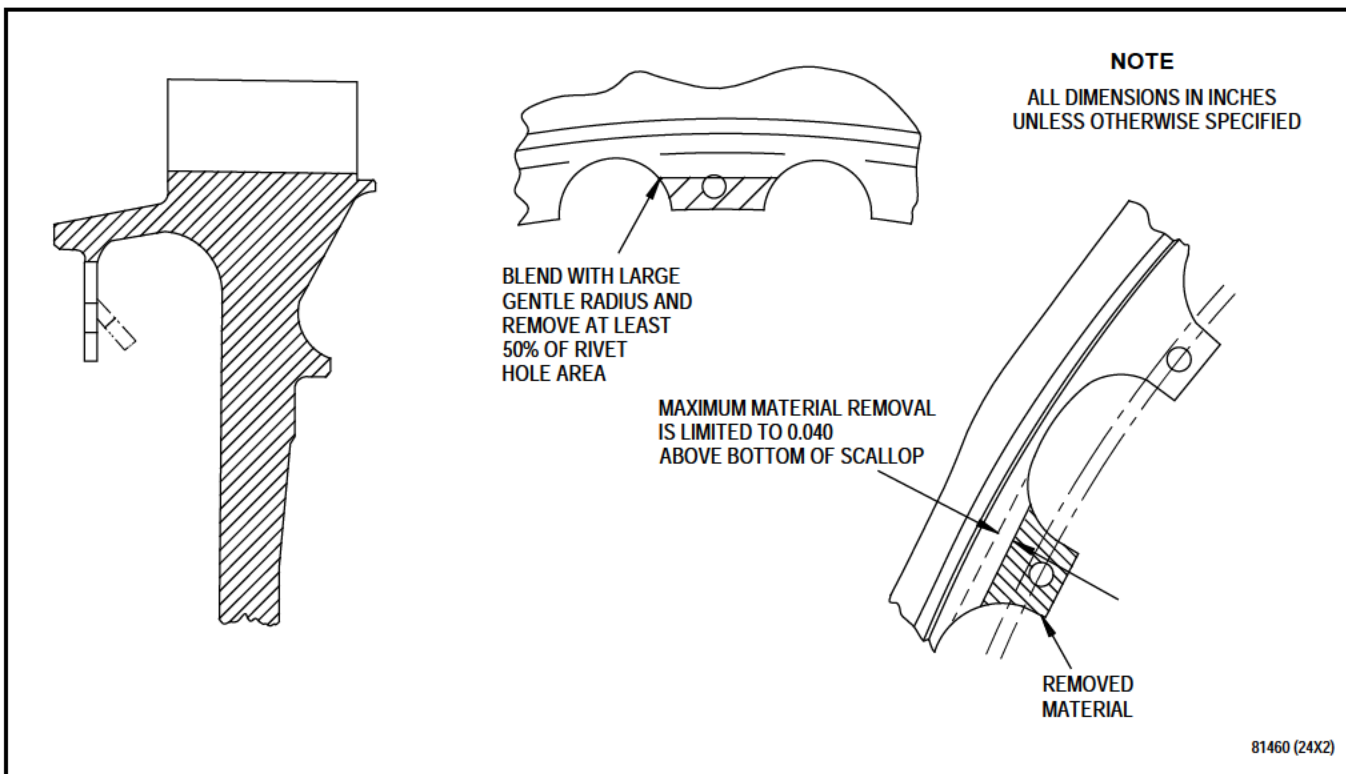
Third Stage Turbine Disk - Balance Weight Flange Tang Removal For Tang Bent Inboard Of Rivet Hole
